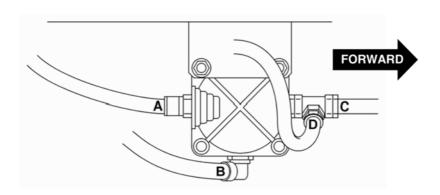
Service brake relay valve (rear) new air pipe arrangement
